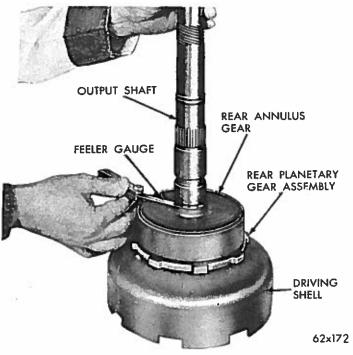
Measuring End Play of Planetary Gear Assemblies, Sun Gear and Driving Shell
